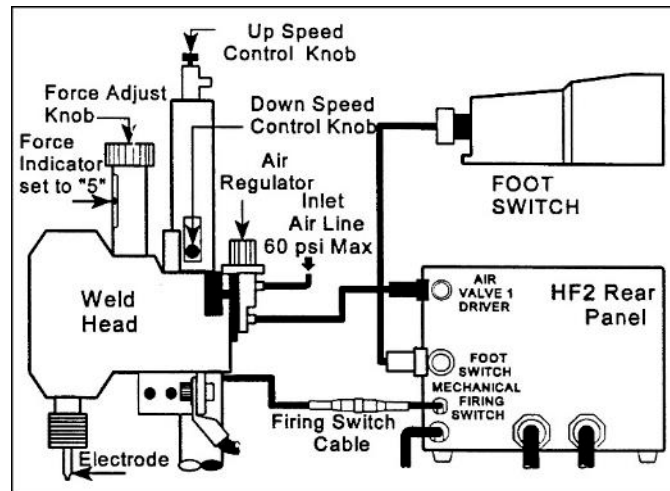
Single Air Actuated Weld Head Connections
